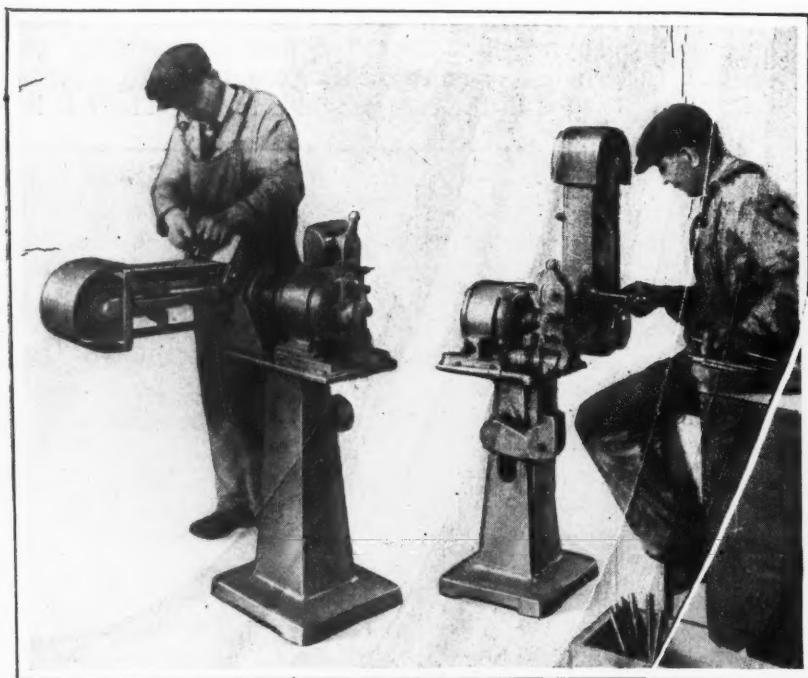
Using the Production Type S Polishing Machine for Flat and Cylindrical Work
